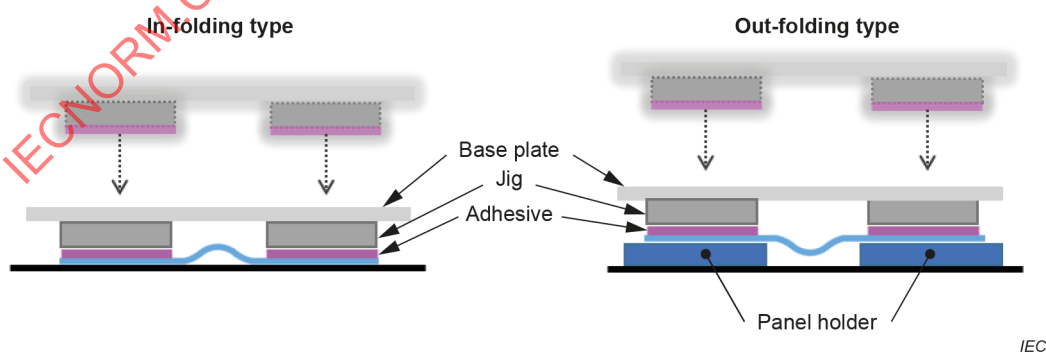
Step 3: Turning over the base plate and attaching it to the back of the panel
